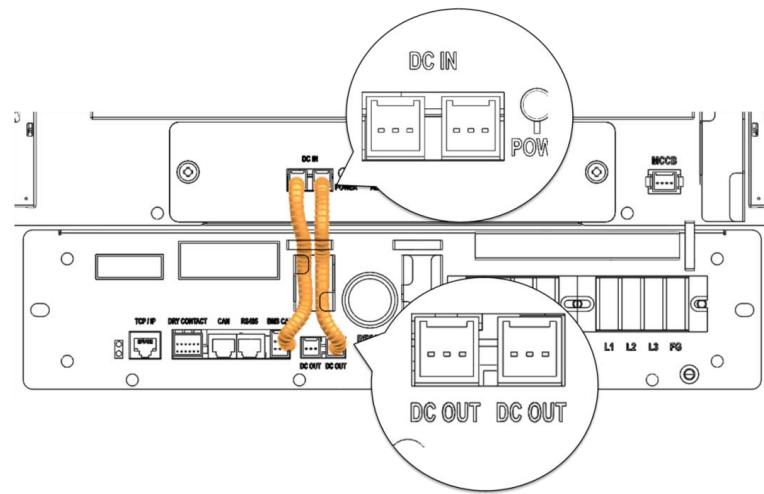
DC Power Cables from SMPS Assembly Type A to SMU
